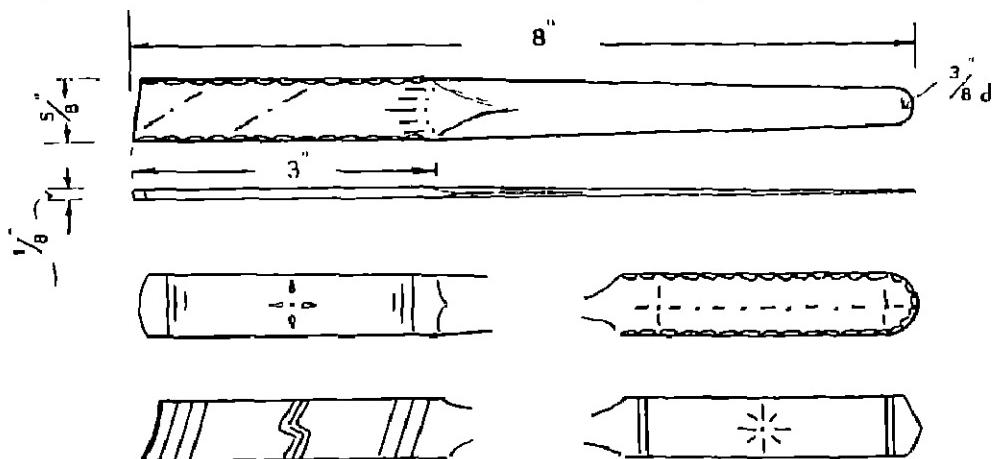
WORKING DRAWING OF PAPER KNIFE, WITH ALTERNATIVE DESIGNS FOR HANDLE
